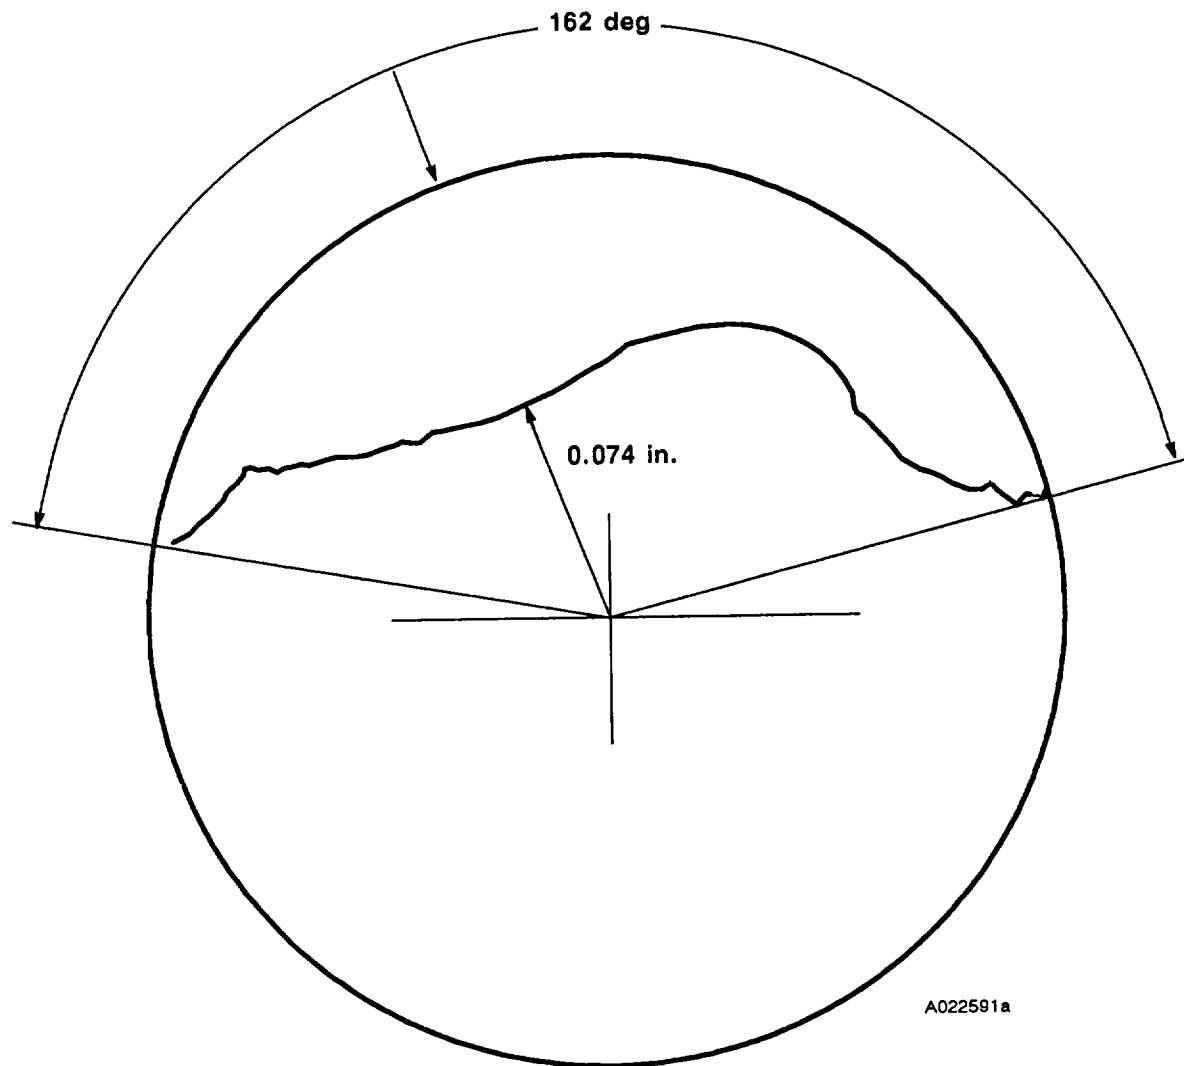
Case-to-Nozzle Joint Primary O-ring Erosion
